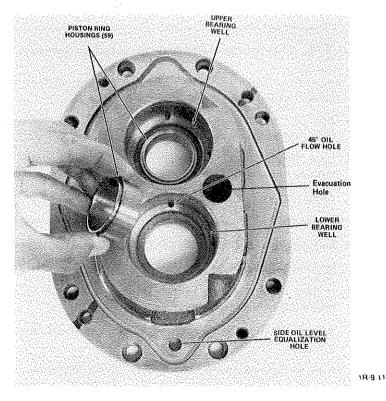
Installing the Piston Ring Housings into the End Plates (WA-250 pump model shown).
